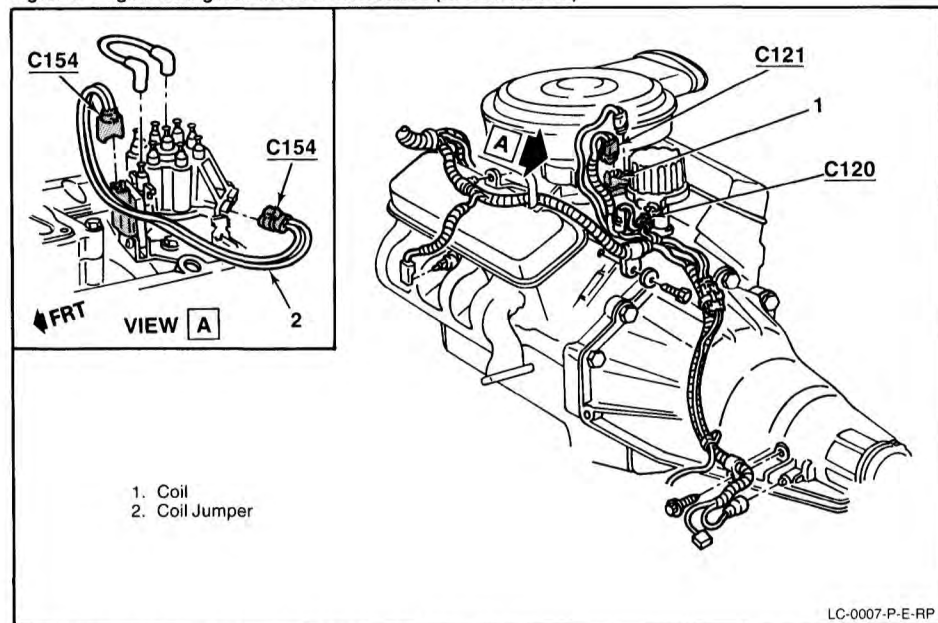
Engine Wiring Harness, LH Side (RPO L19 w/P32)
